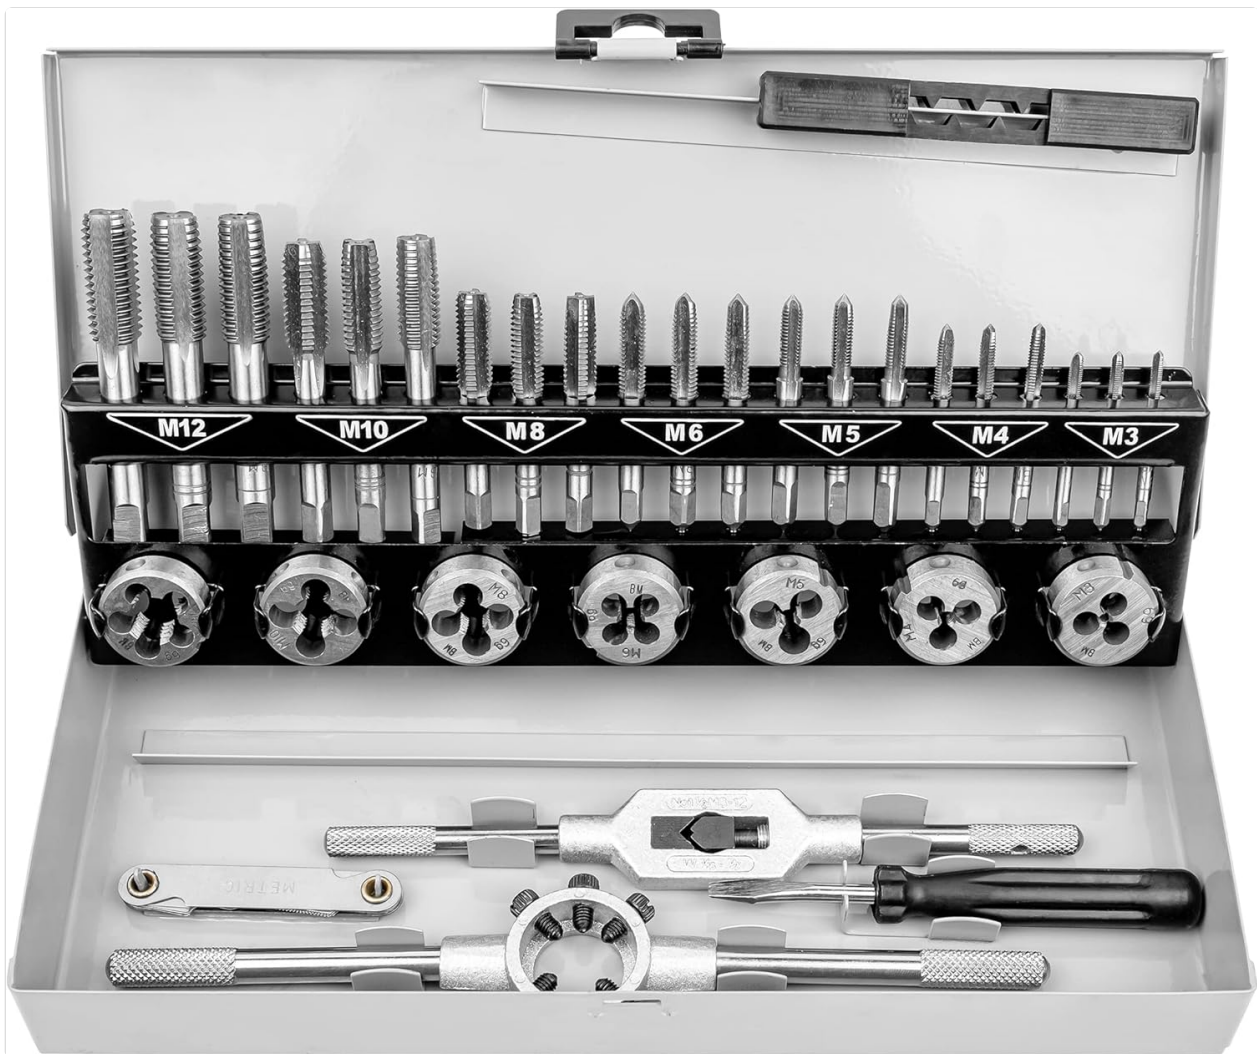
The complete 32-piece thread cutting tool set, neatly arranged in its metal storage case.
